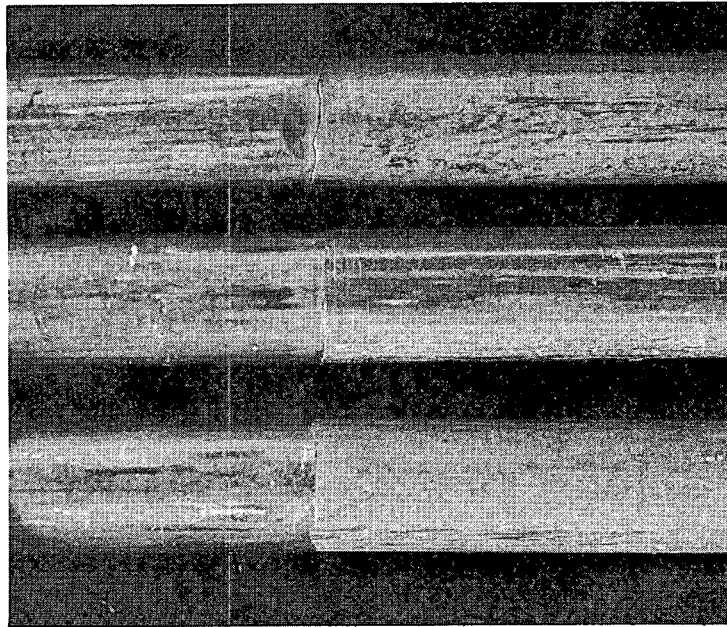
JOINT BETWEEN TYPE 304 STAINLESS STEEL END CAP AND FUEL-PIN SECTION OF SPECIMENS 10-1, -2, AND -3
